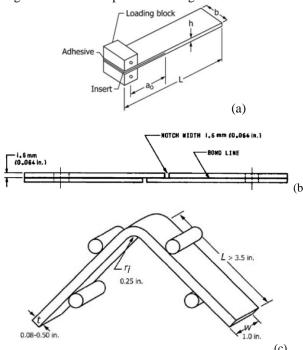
Specimen drawings for the three mechanical tests used to measure baseline properties: (a) DCB test, (b) SLS test, and (c) CB test.
